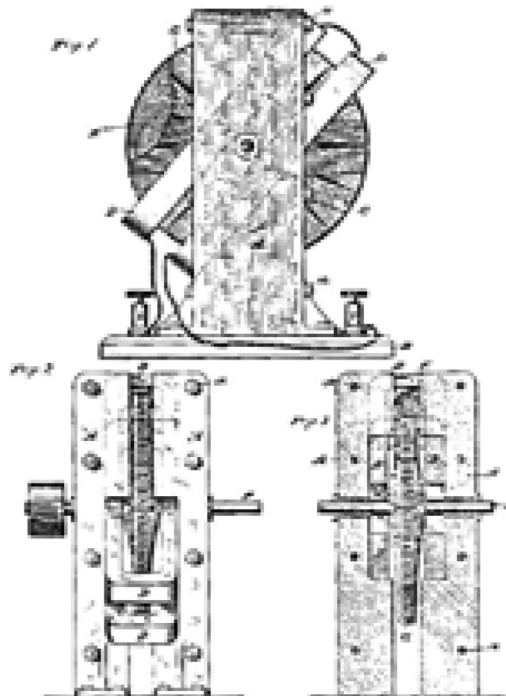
Electromagnetic machine with a disk rotor built by Tesla.
